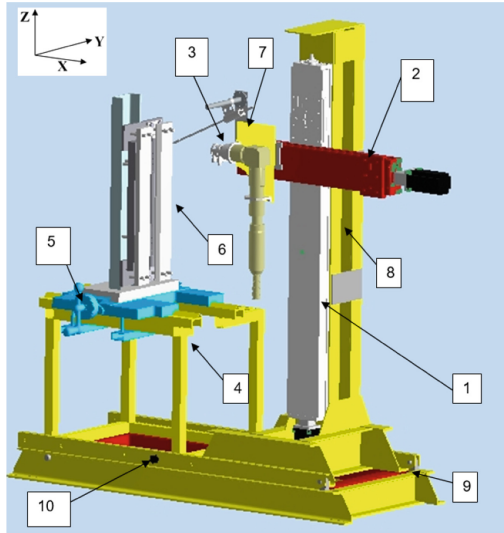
Laboratory stand model, where 1 – is the module of linear movement along the Z-axis; 2 – modulus of linear displacement along the X-axis; 3 – welding head; 4 – clamp for fixing welding specimens; 5 – platform for moving the clamp in the XY plane; 6 – clamp with the test sample; 7 – bracket for mounting the welding head; 8 – column; 9 – fixed frame; 10 – base of the frame.
